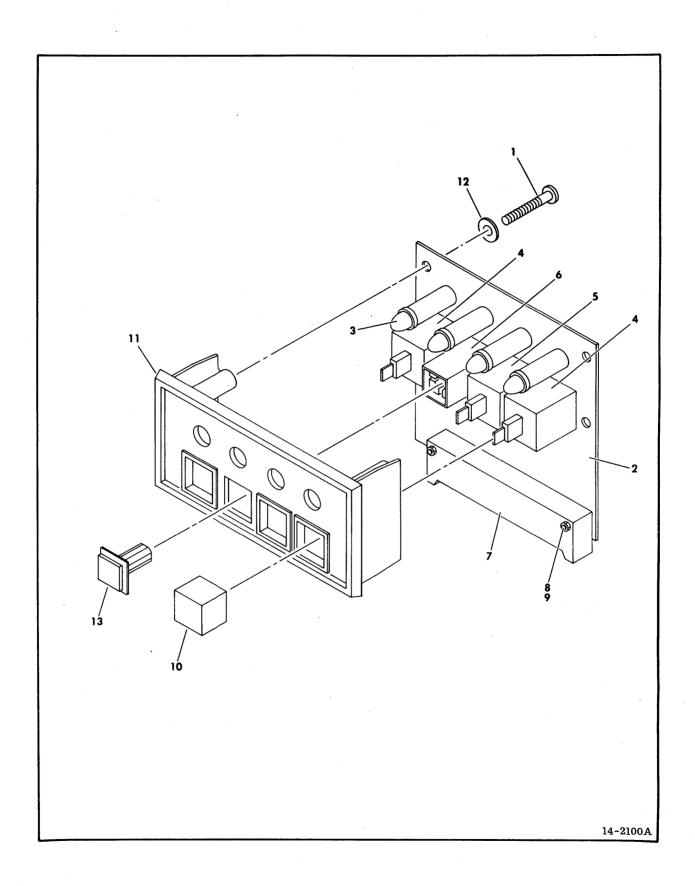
Drive Electronics Assembly (Sheet 4)
